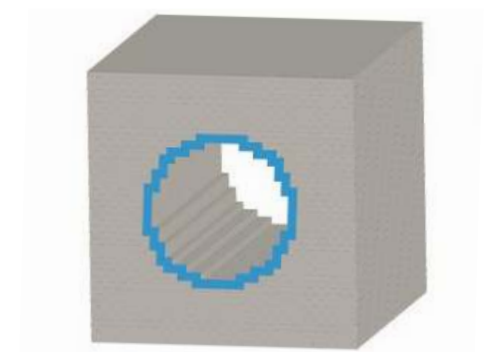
Resolution of a horizontally-oriented hole after printing (reaming recommended).
